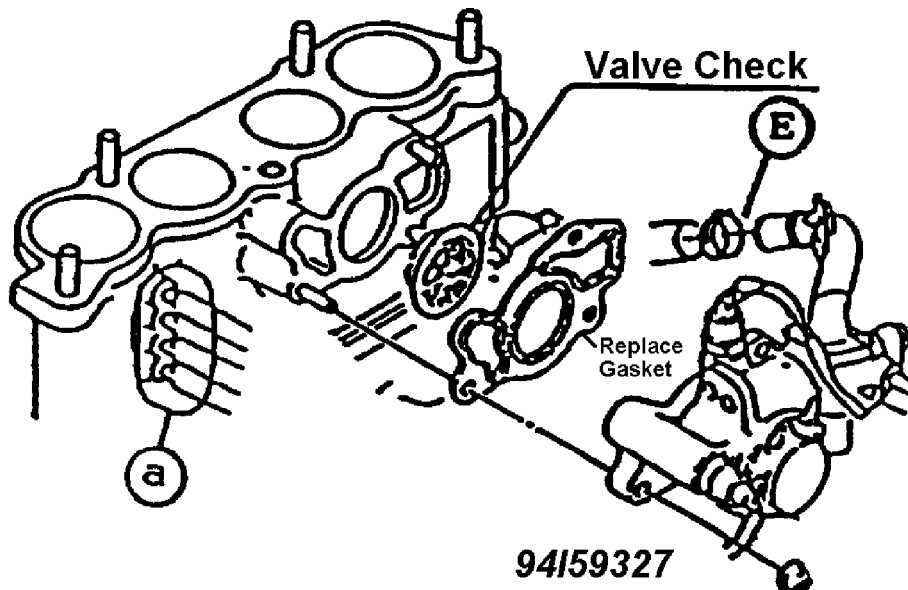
Removal of Relief Air Hose & Vacuum Tubes
